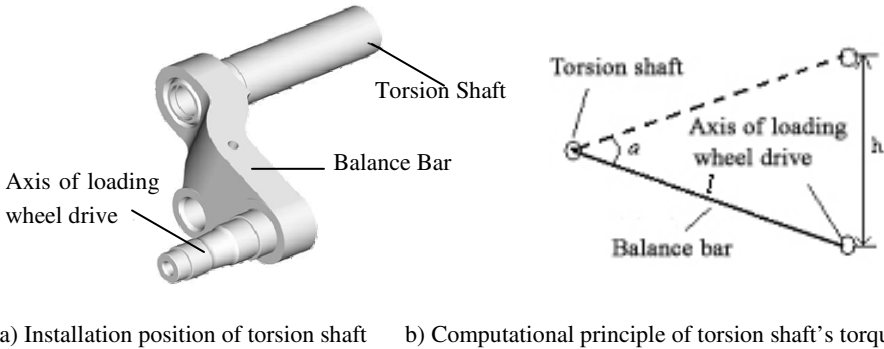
Measurement Principle of Torsion Shaft's Torque
